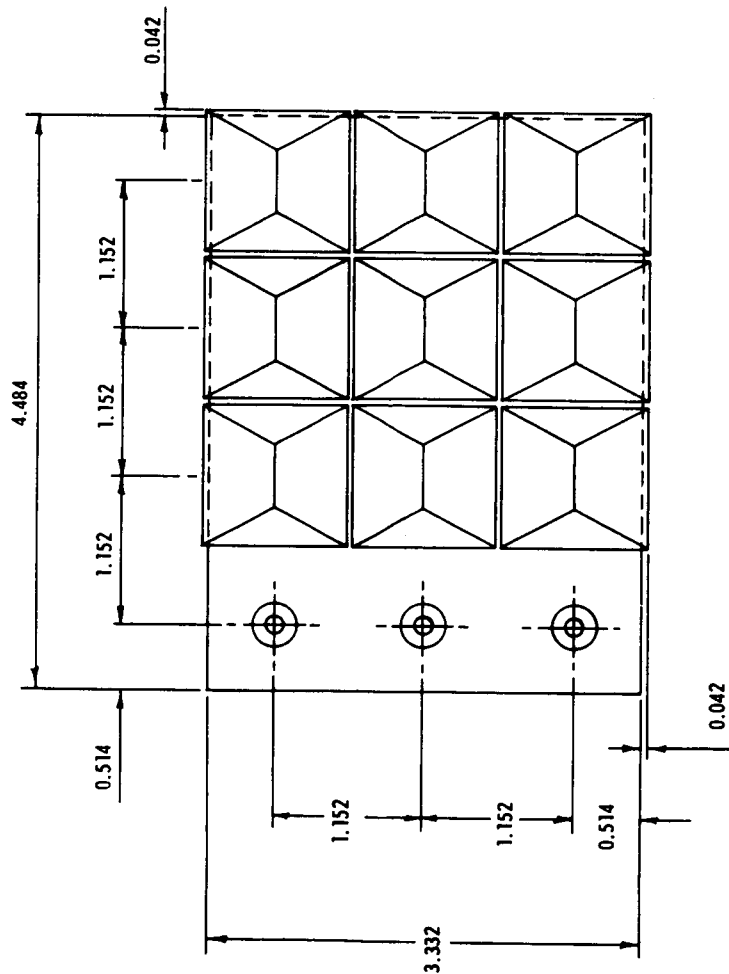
REFERENCE DESIGN—GENERATOR PANEL SECTION ASSEMBLY
